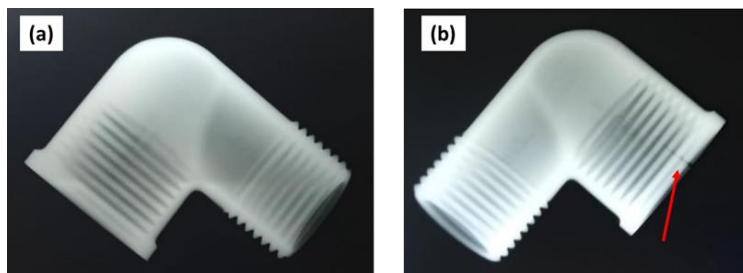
Radiographic inspection of CuZn40Pb2 sanitary fittings: (a) fitting produced under optimized conditions, (b) fitting manufactured under non-optimized conditions, revealing internal defects
